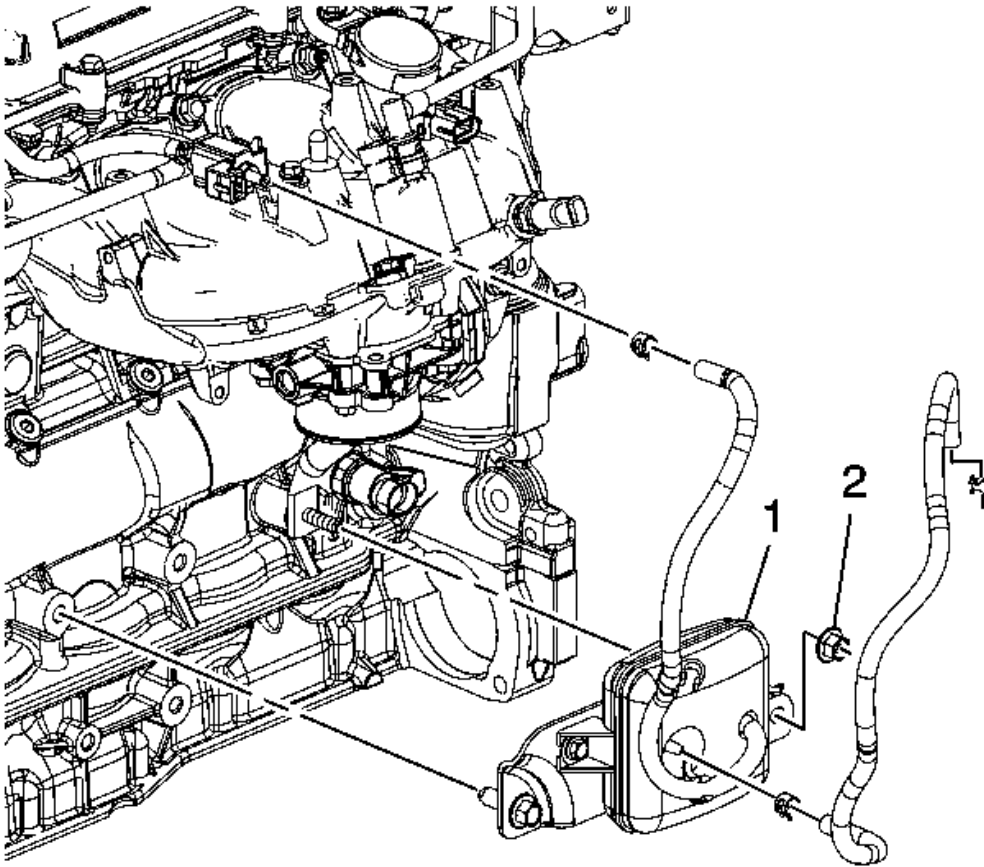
Identifying AIR Bypass Valve Tank Assembly
